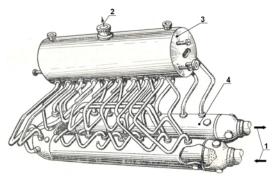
Shippingport NPP SG: (1) primary inlet/outlet; (2) steam outlet; (3) separator drum; (4) evaporator
